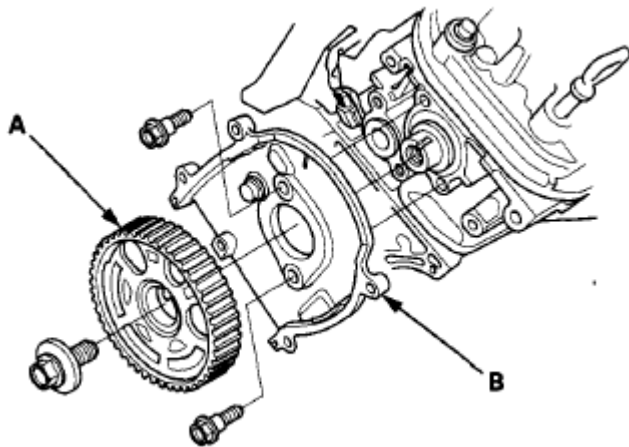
Removing Camshaft Pulleys And Back Covers - Front
